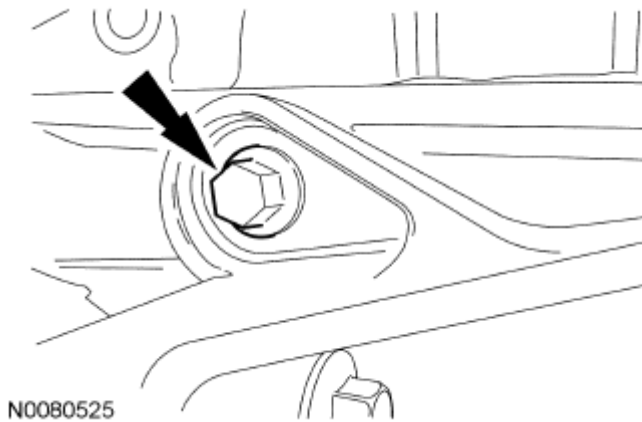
Locating PTU Bracket-To-Engine Bolt
